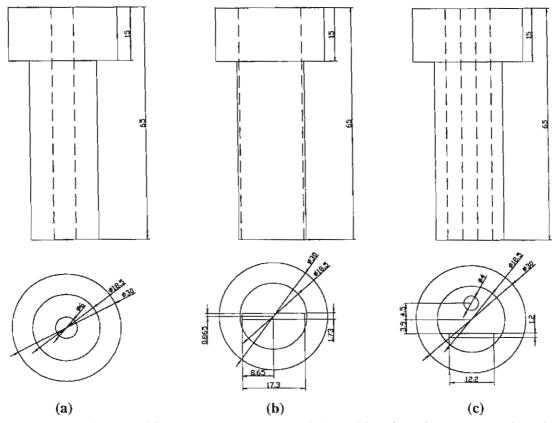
Die designs and dimensions (units in mm): (a) single channel die with circular cross-section; (b) single channel die with slit cross-section; (c) dual channel die with circular and slit cross-sections.
